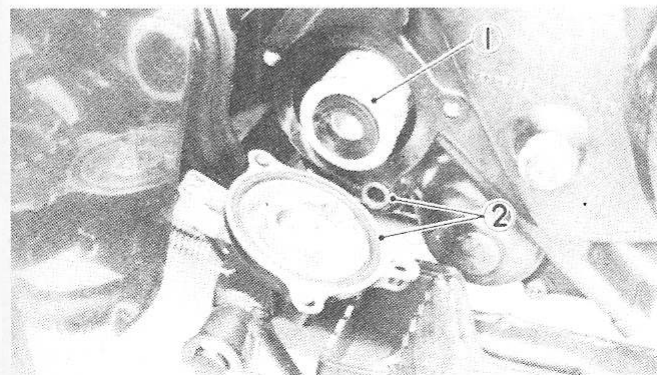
When reinstalling the filter (1), make sure the O-rings (2) are in place and in good condition (Sec 9)
